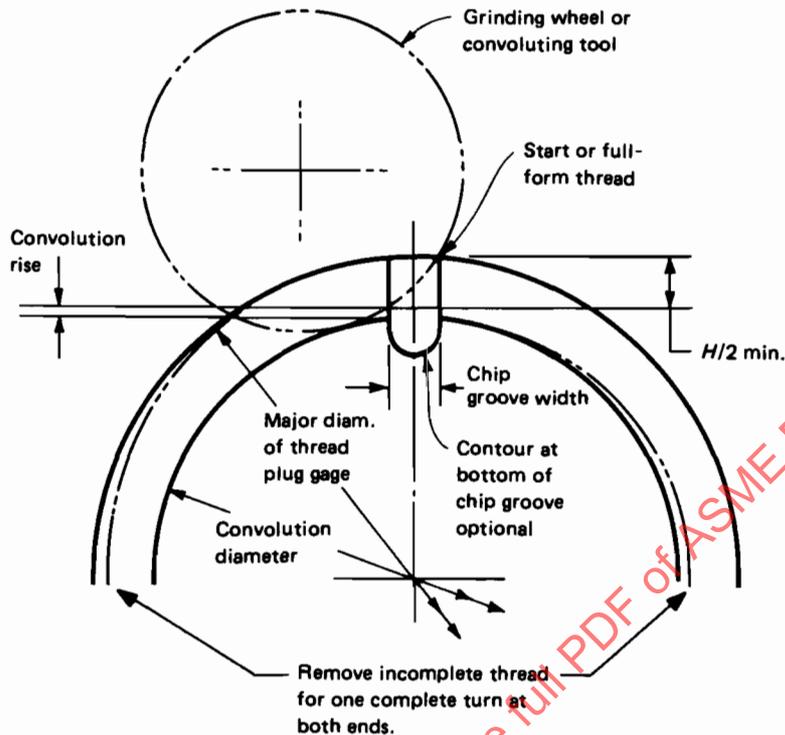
PARTIAL END THREADS AND CHIP GROOVES
